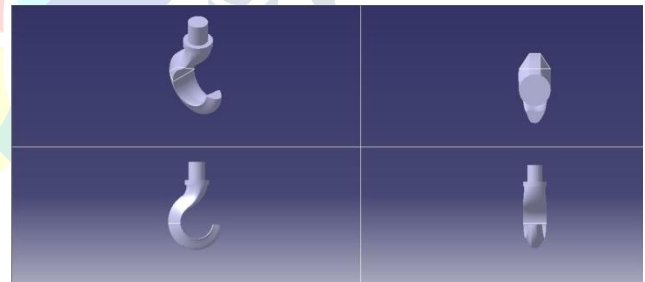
Modeling of EOT crane hook in Trapezoidal cross section
